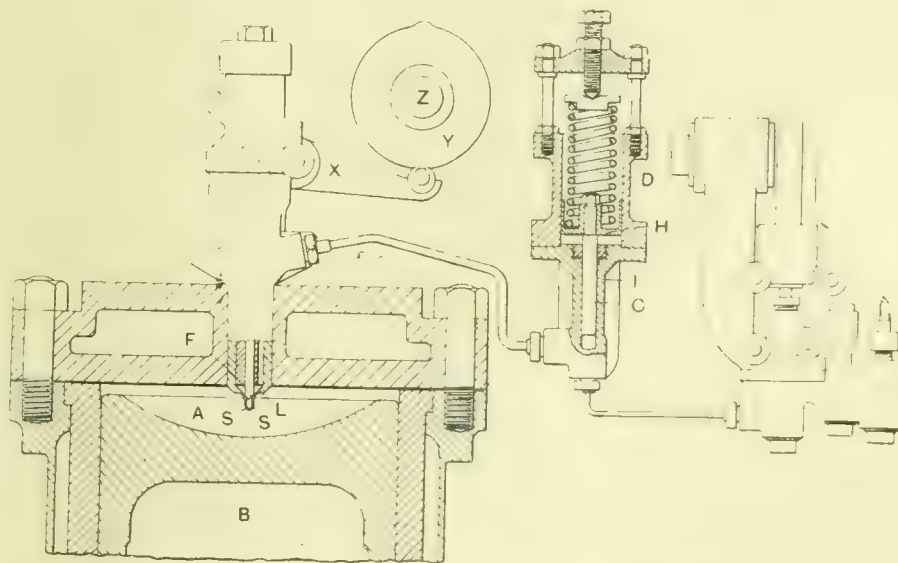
INTERNAL-COMBUSTION ENGINE FOR HEAVY FUEL OILS.
